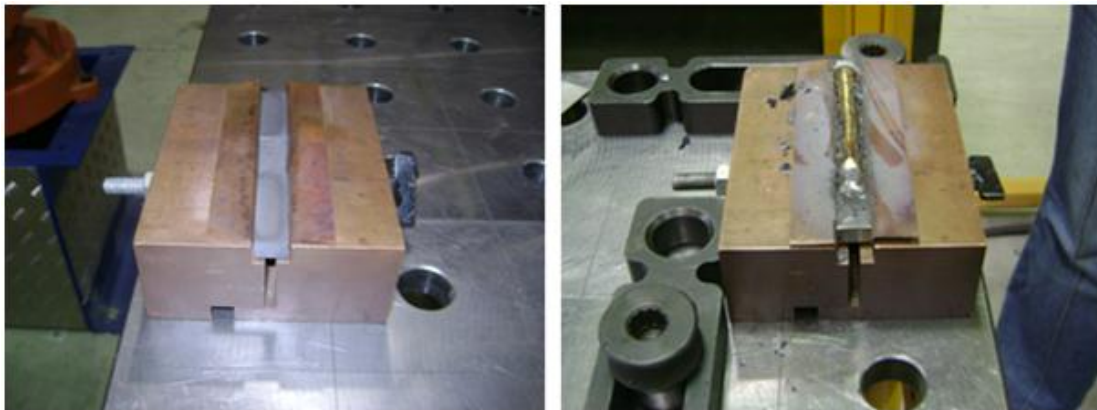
a – welding fixture with test piece assembly before the deposition of the single weld pass; b – welding fixture with test piece assembly immediately after deposition of test run with flux-cored consumable.
